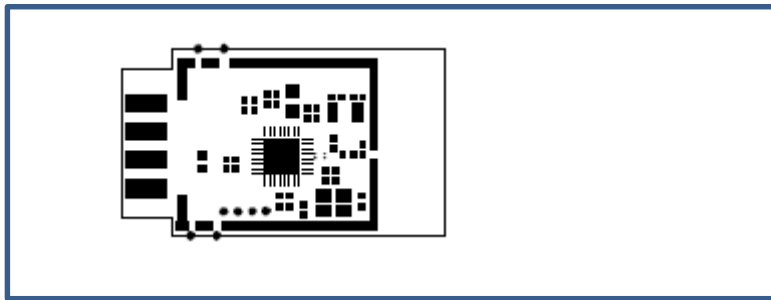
Elstat Bluetooth Module Flat mounted onto PCB
